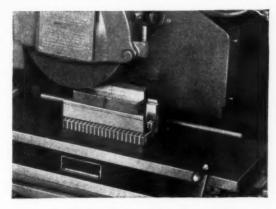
Here a laminated angle iron is used in grinding a measuring table for a comparator.
